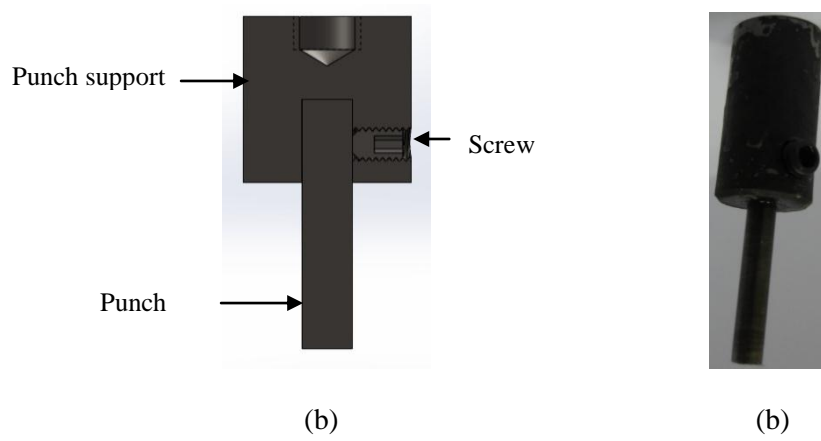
Optimized punch:(a) assembly view with the description of the components, (b) photo.
